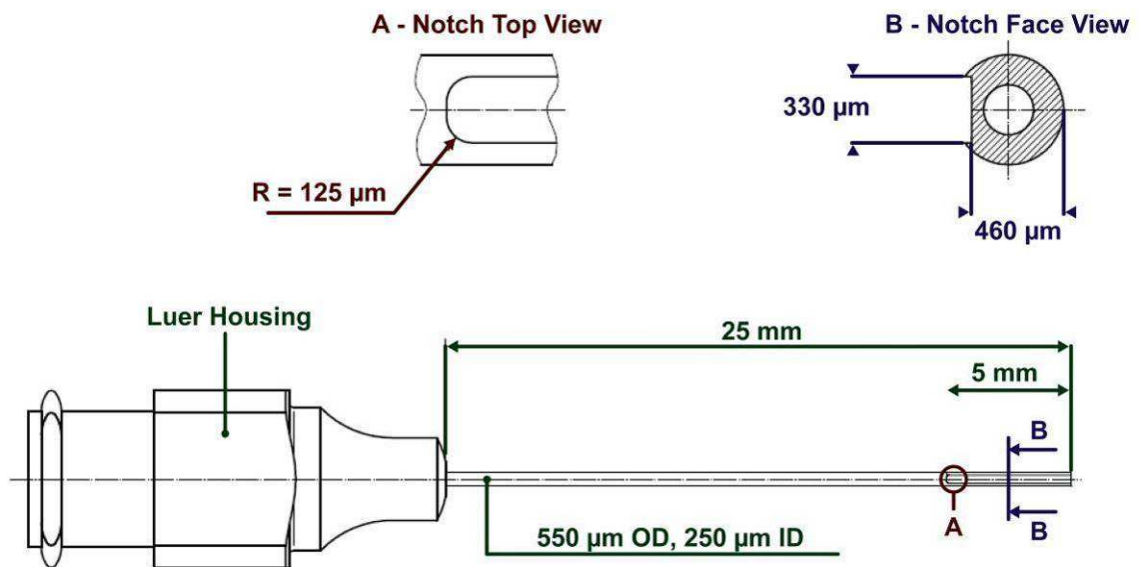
CAD drawings with labels highlighting the key dimensions of the UNIMED micro-milled notch in the end of the stainless steel luer needle.
